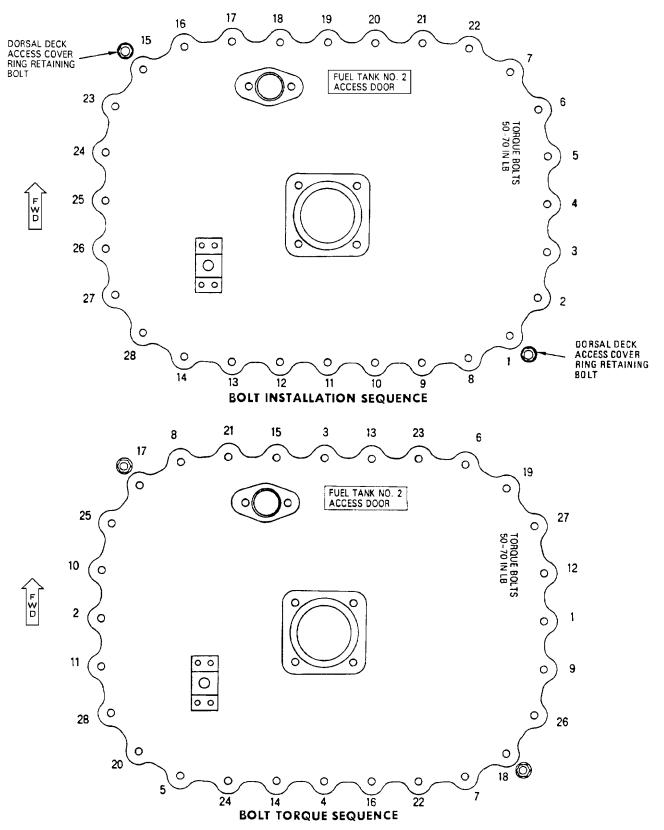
No. 2 Fuel Tank Access Cover Bolt Installation and Torque Sequences
